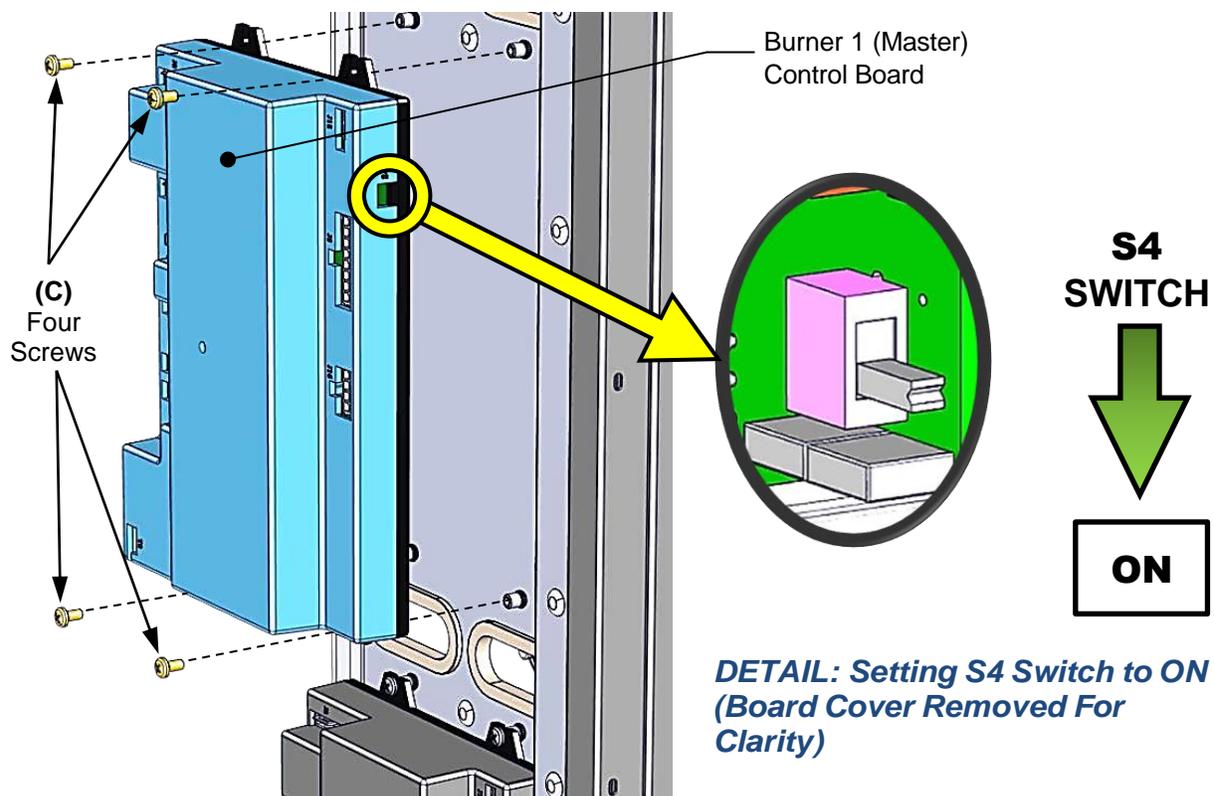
Replacing the Burner 1 (Master) Control Board
